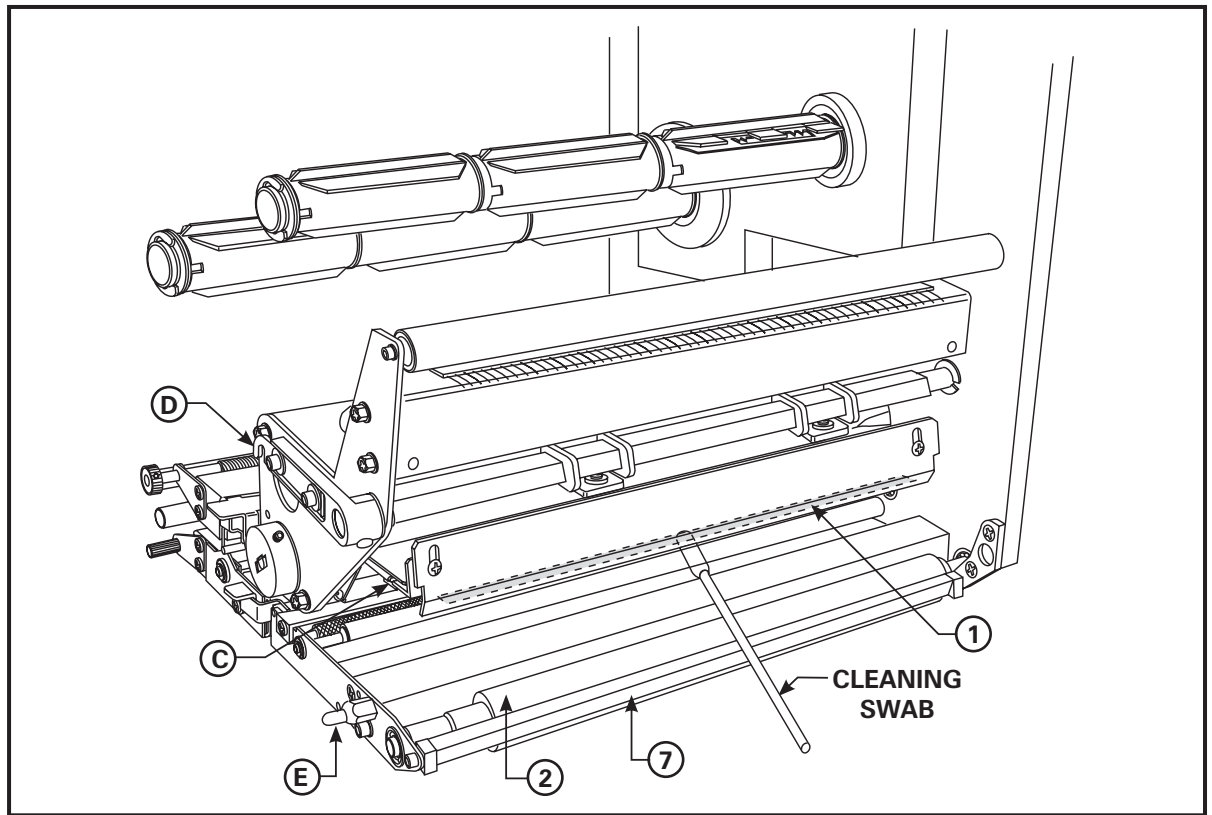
Printer Cleaning (Right-Hand Unit Shown)
